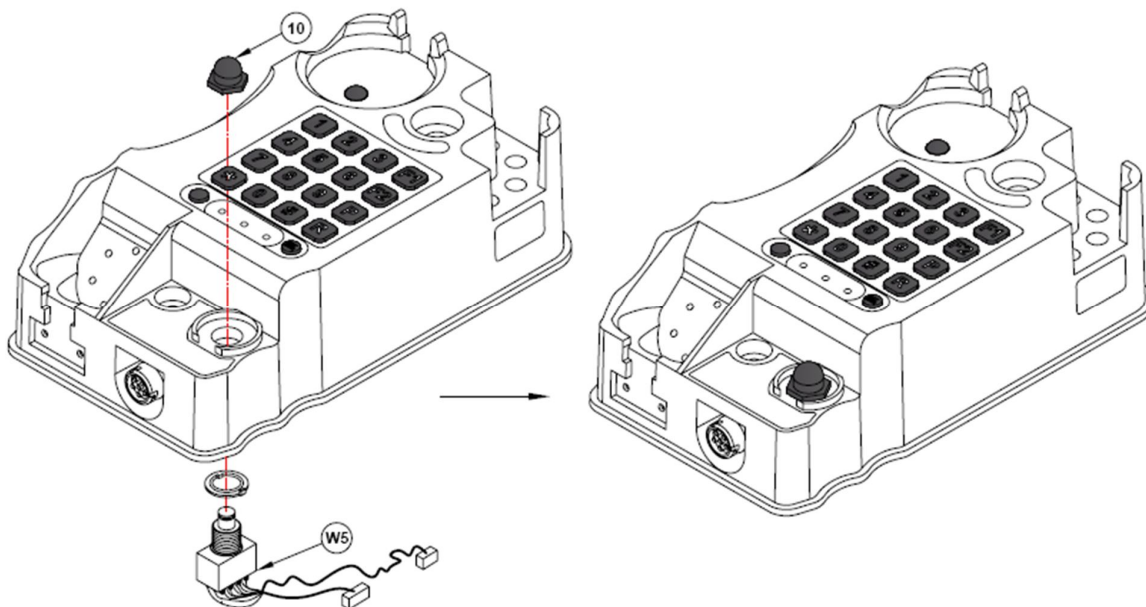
Re-assembly of Ringer switch (MAGNETO CALL) assembly
